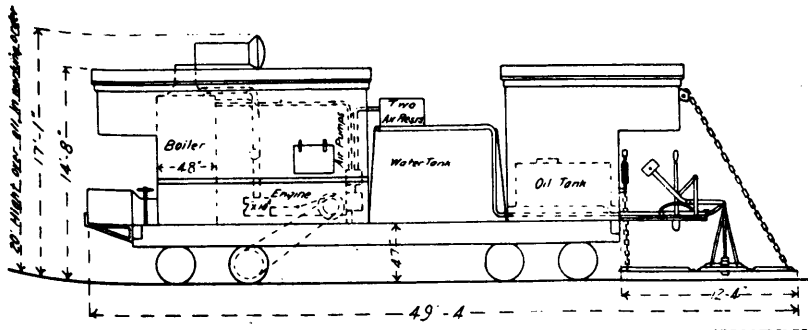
ARRANGEMENT OF MACHINRY IN WEED-BURNING CAR.
